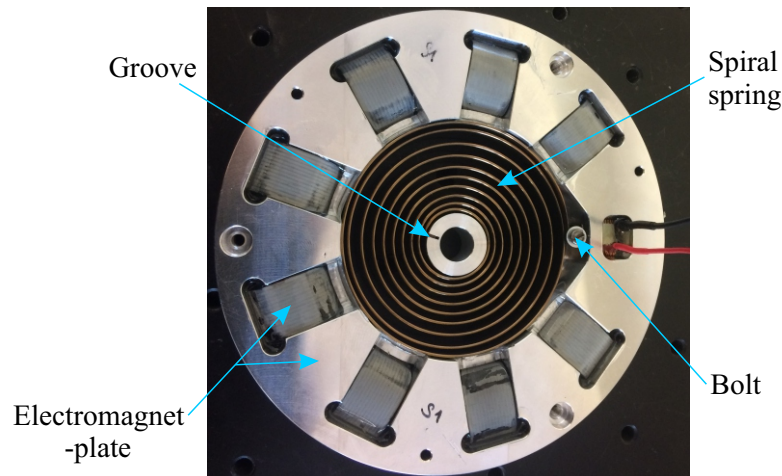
Fixture of a spiral spring in an electromagnet-plate.
